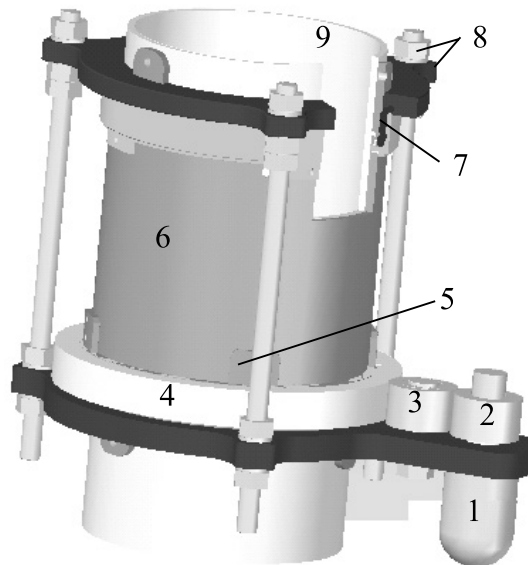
The assembly view of the sensor. 1 – Stepper motor, 2 – Driver gear, 3 – Intermediate gear, 4 – Transmission gear, 5 – Support mechanism, 6 – Cylindrical tube, 7 – Bearing, 8 – Fix mechanism, 9 – Inner tube
